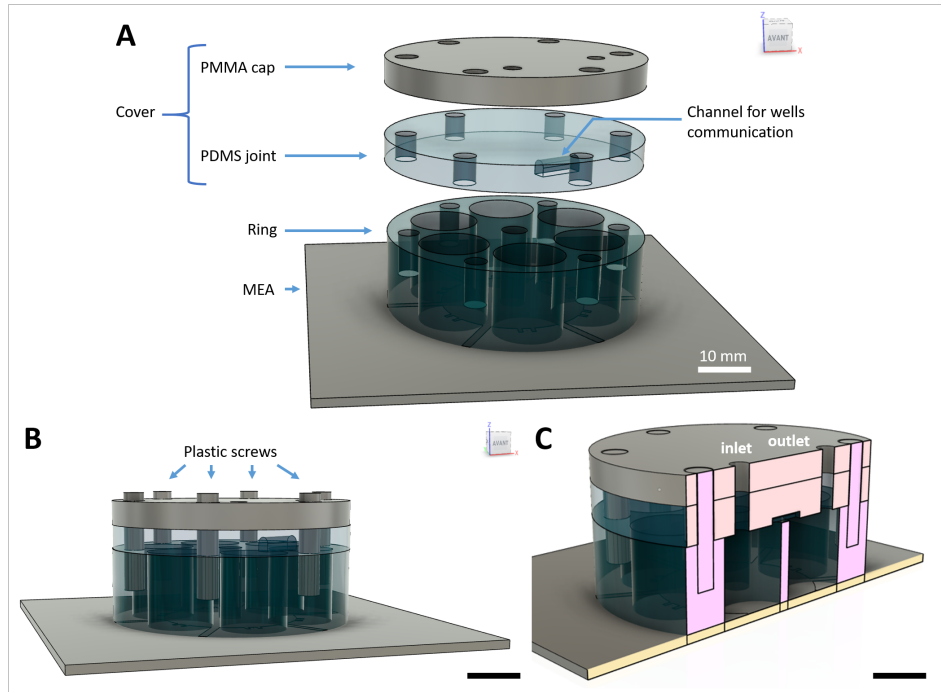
CAD views of the chip design 1 in microfluidic mode. (A) Exploded view and description of the system components. (B) Chip view when the cover is screwed. (C) Cut view of the CAD model showing the inner part of the chip when the cover is screwed.
